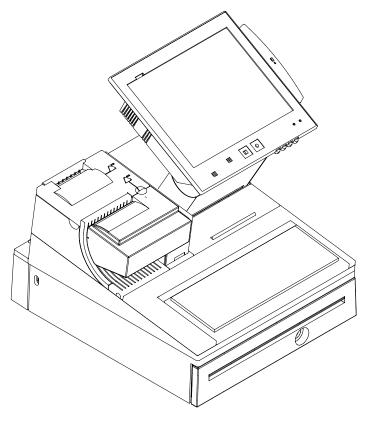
Full-size cash-drawer mounting option with keyboard-integration tray
